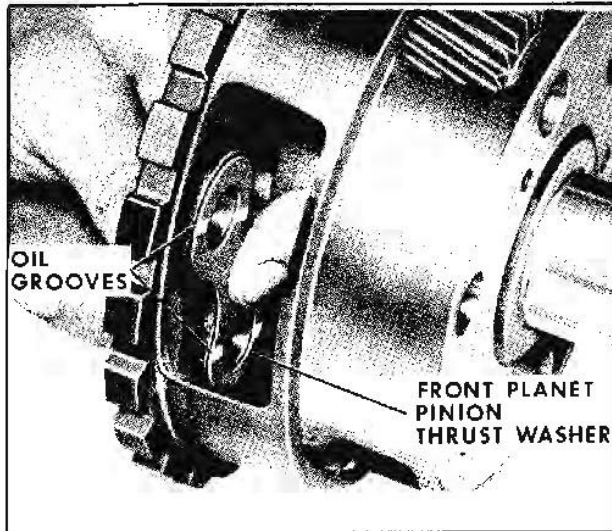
B-93 Installing Long Pinion Front Thrust Washer
